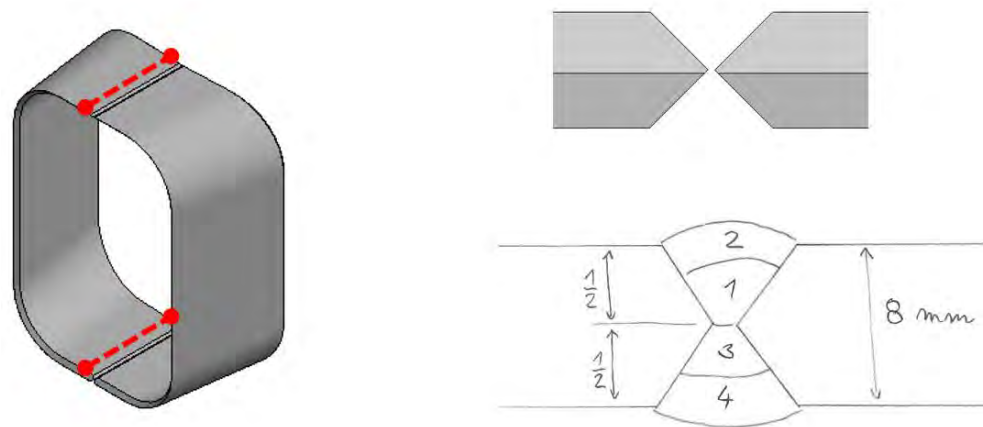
Connecting welds of the MX port shell, the corresponding bevel shape and layout of weld passes
